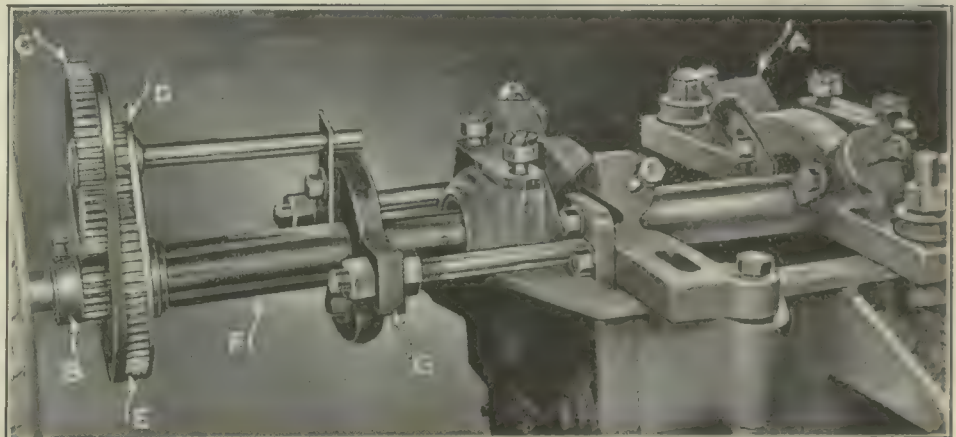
MECHANISM OF BORING FIXTURE SHOWING METHODS OF DRIVING AND FEEDING BORING BAR
